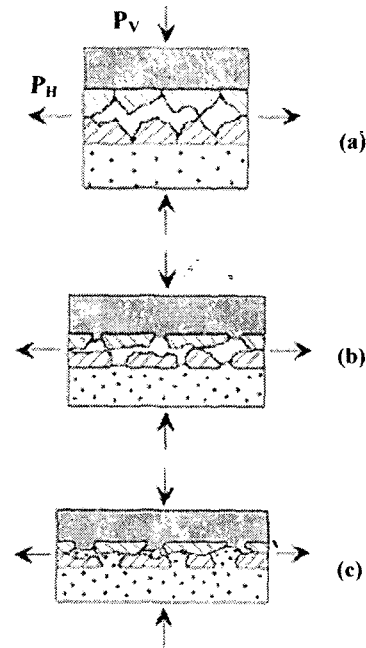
Bonding mechanism in cold pressure welding: (a) original contact shape showing surface roughness, (b) local fracture by microcrack at the contact surface, (c) completion of local extrusion.
